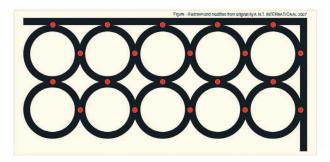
Schematics of ferrule design spacer showing welds as red dots.
